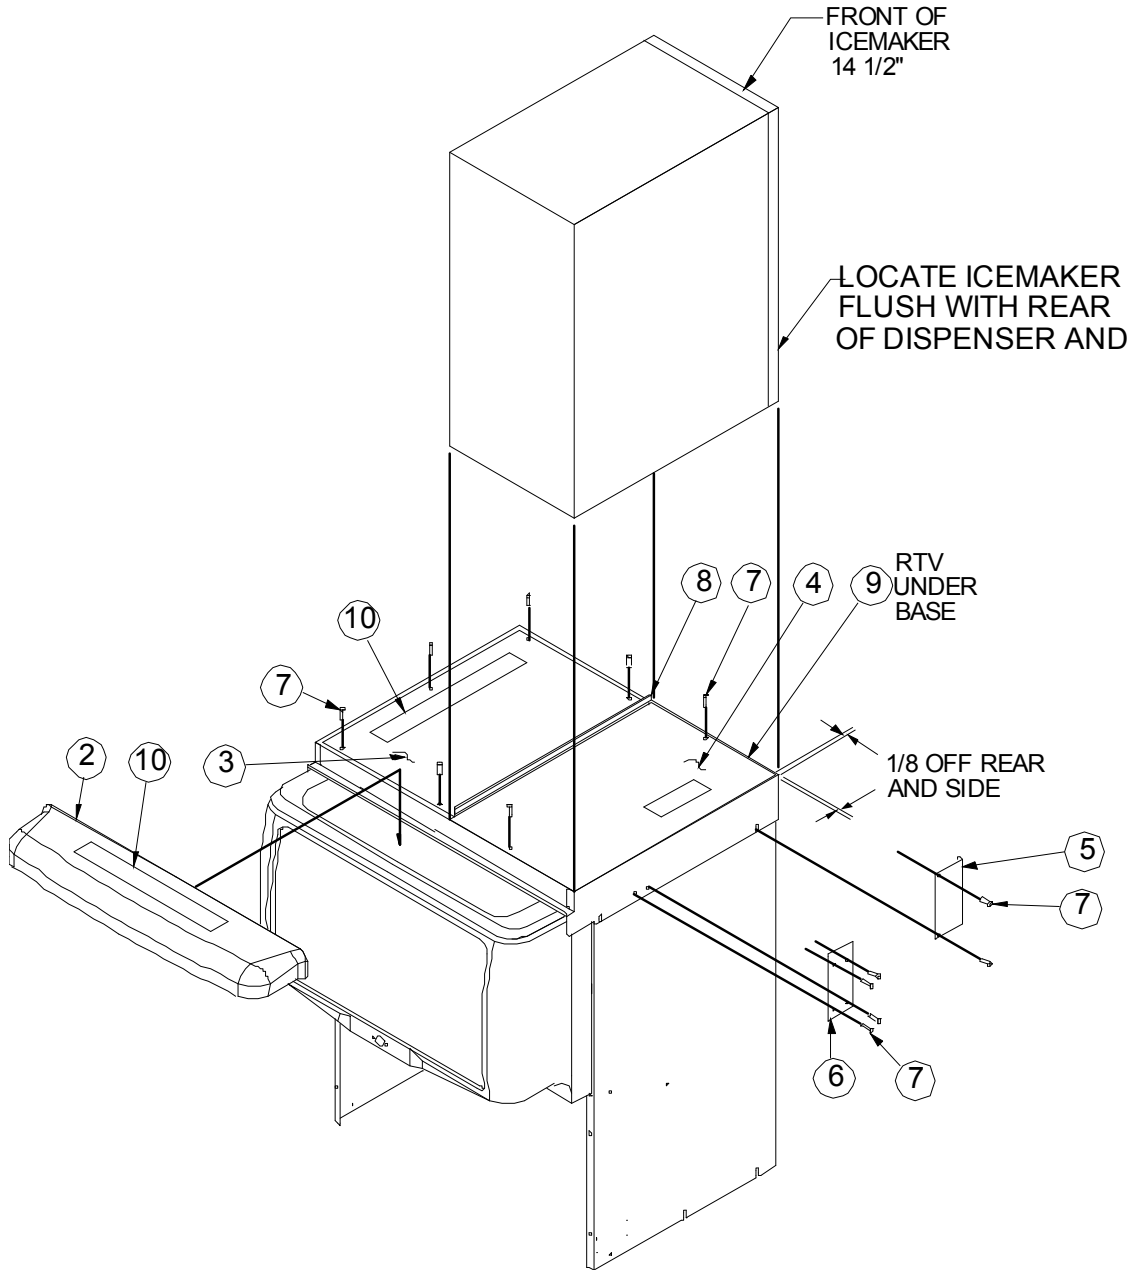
Wilshire WCC500/700 14-1/2 Inch Dispenser Assembly
